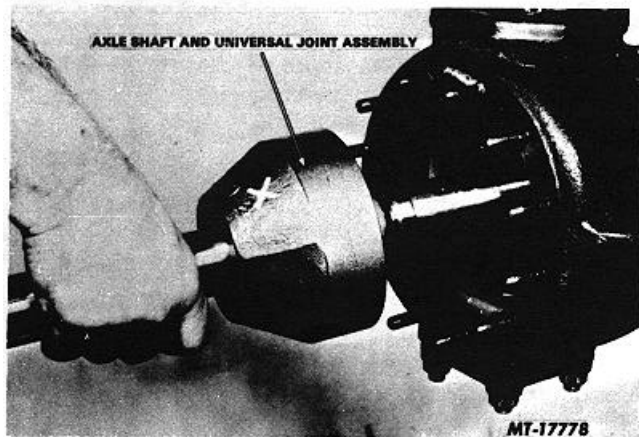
Removing Axle Shaft and Universal Joint Assembly
